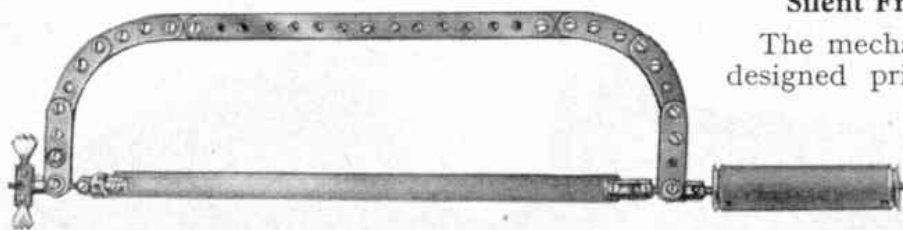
A useful Hacksaw Frame, built from Meccano parts.
